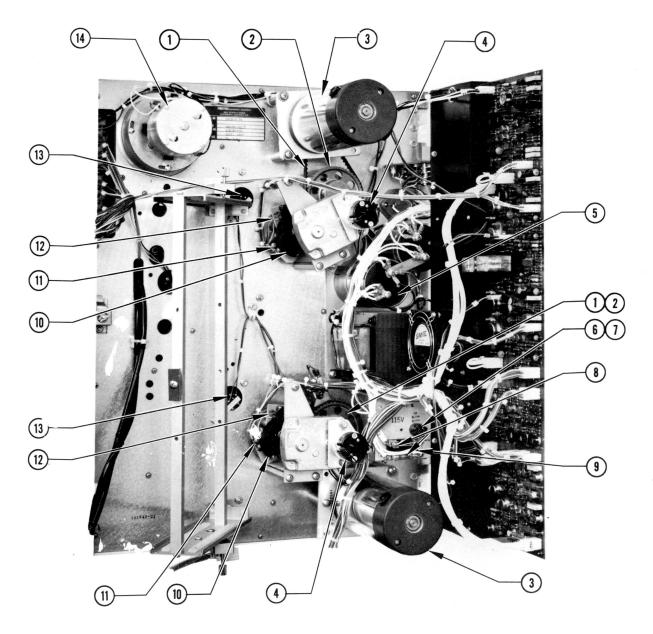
75 ips 6000 Series Transports, Photo Parts Index
